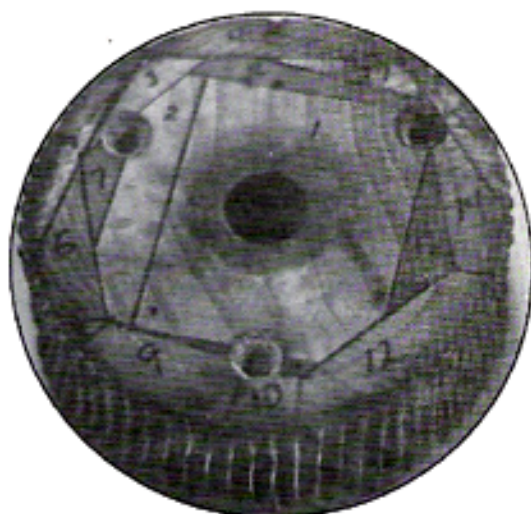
ORIGINAL GEAR CONSTRUCTED OF 18 SEPARATE PIECES OF WOOD.
